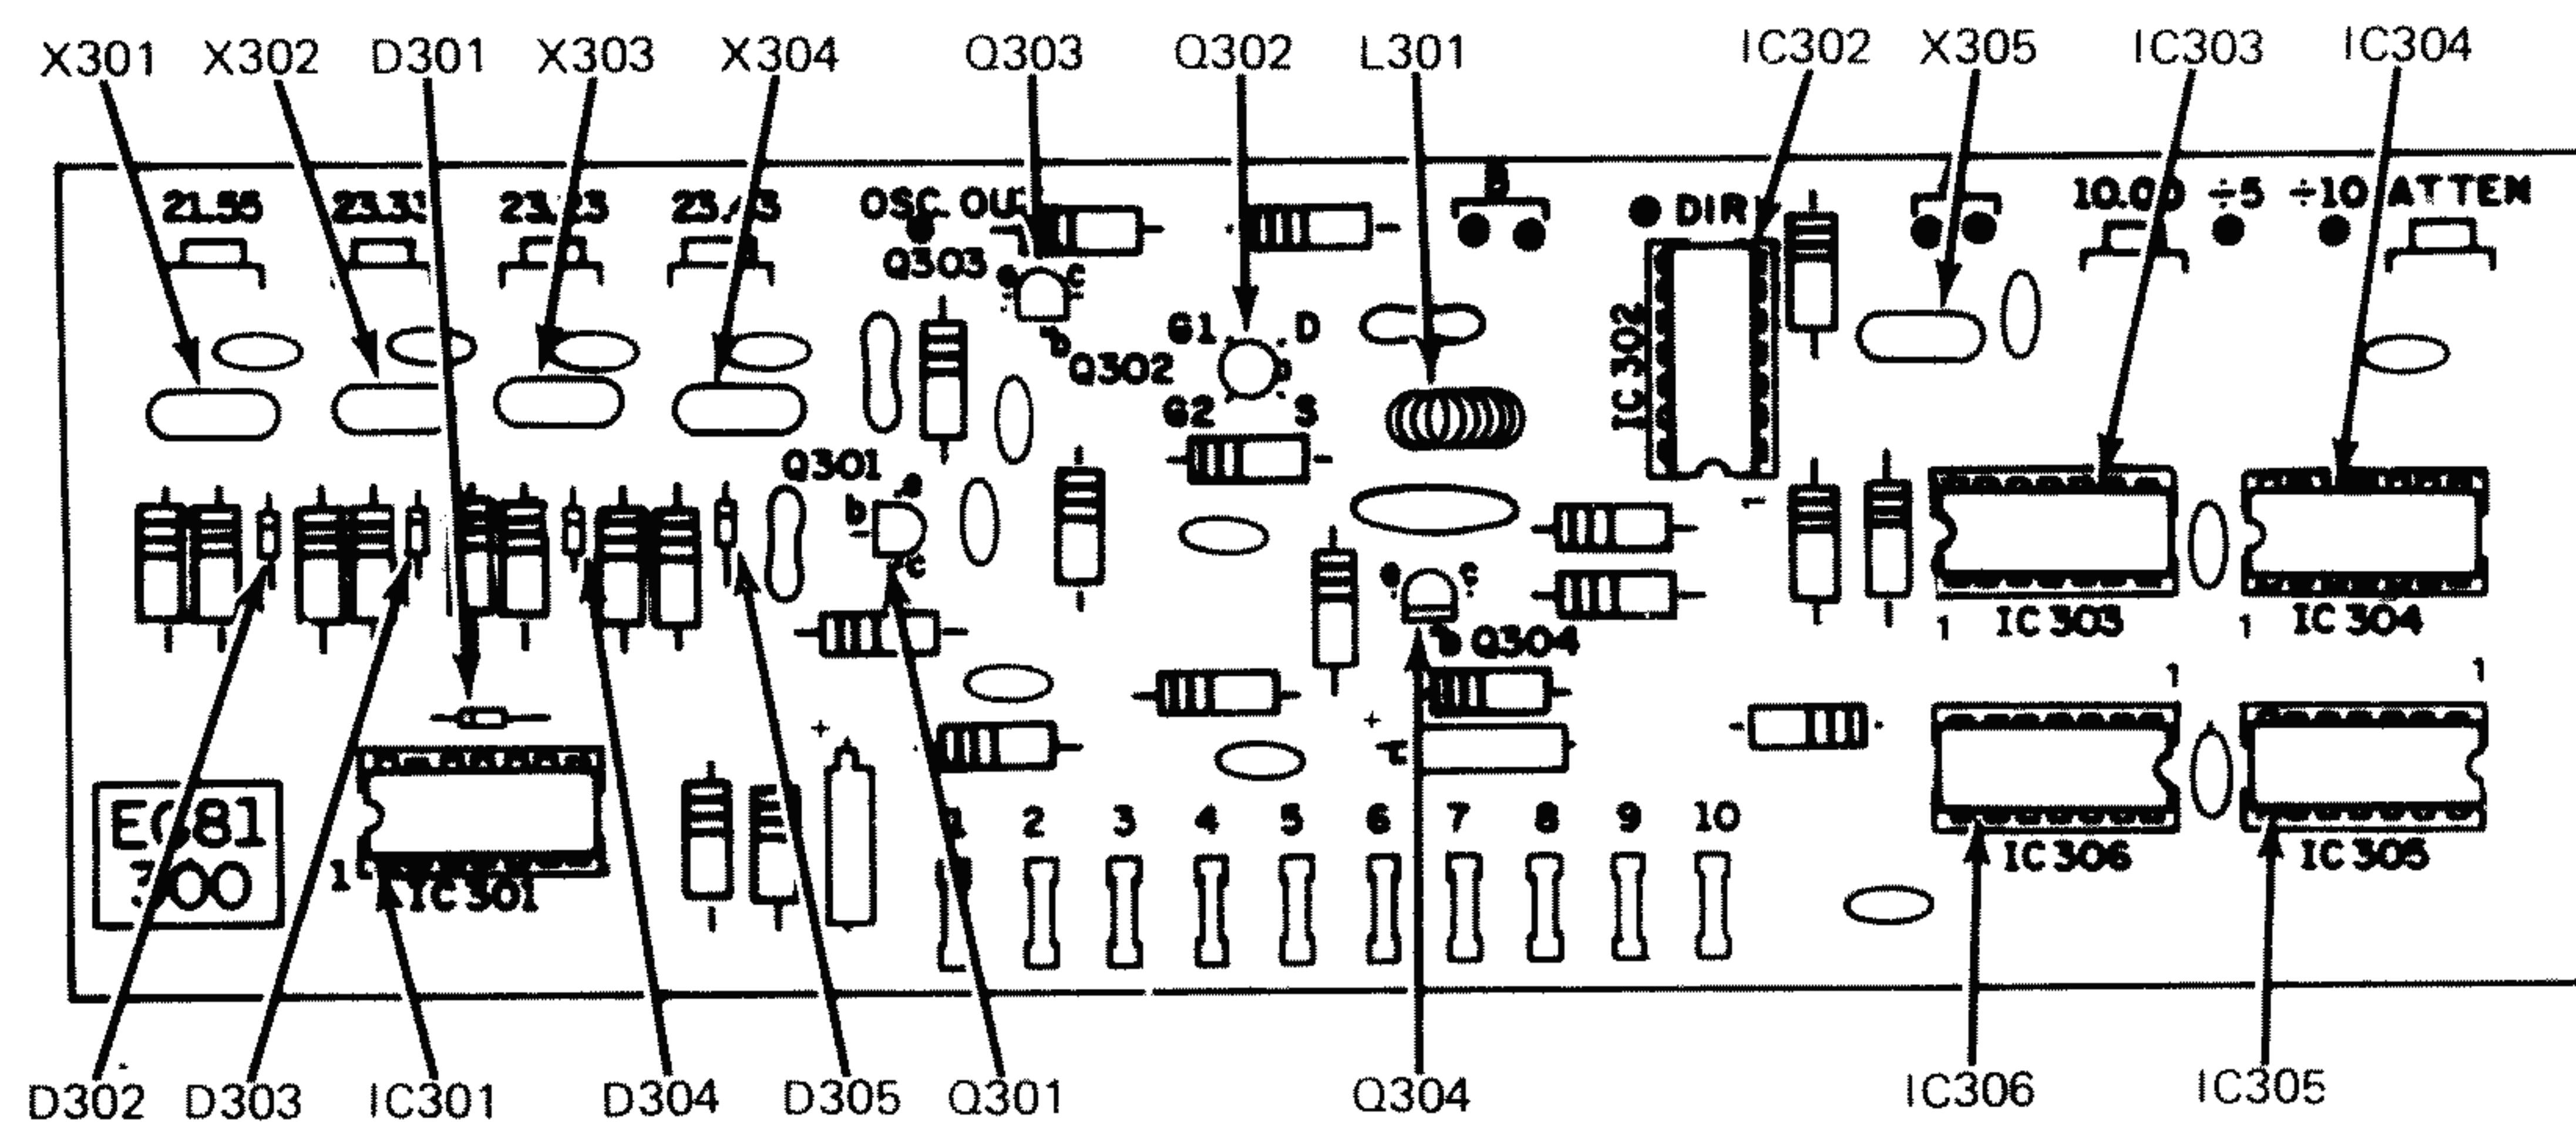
Miscellaneous parts identification on the oscillator circuit board.
